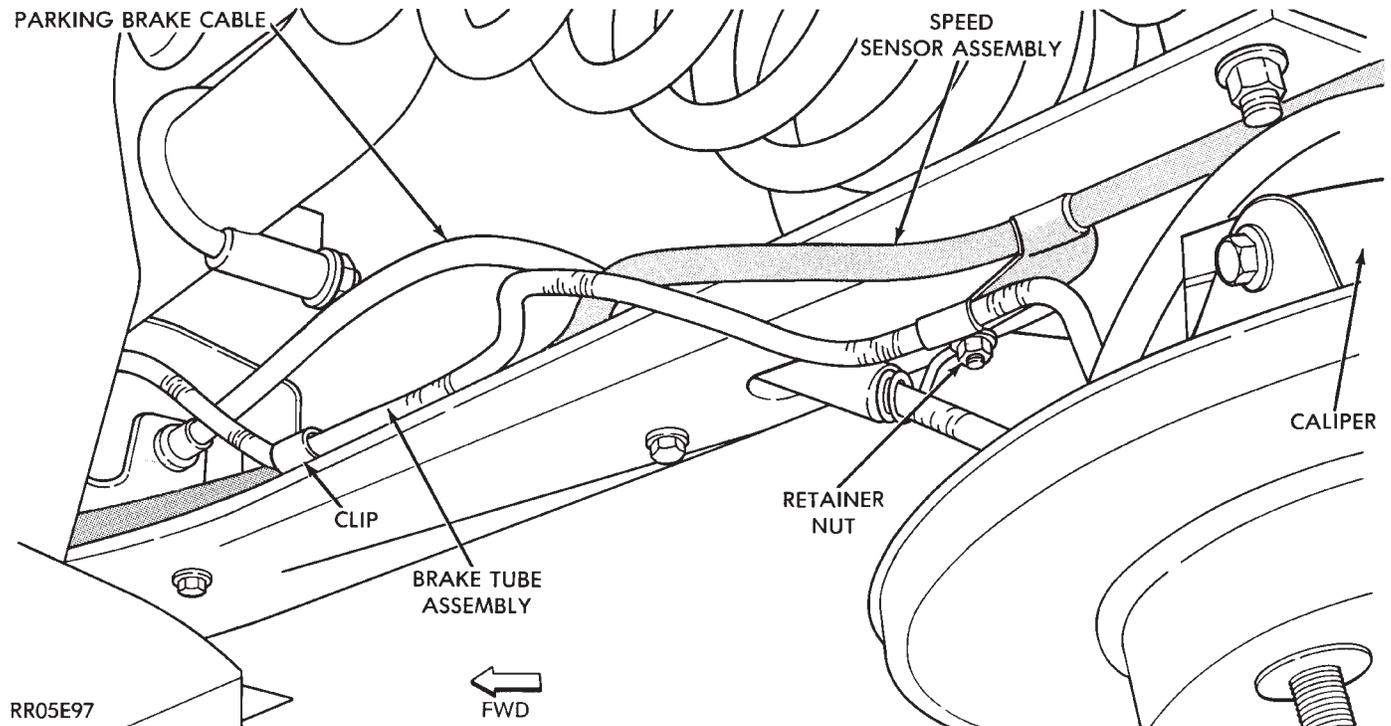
Rear Wheel Speed Sensor Routing at Trailing Arm
